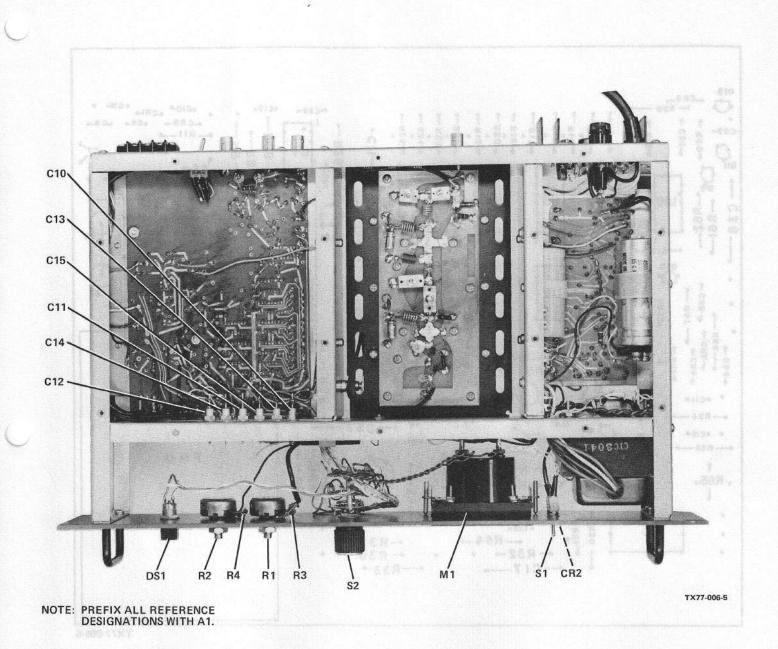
FM-15QE Exciter Bottom View with Cover Removed.
